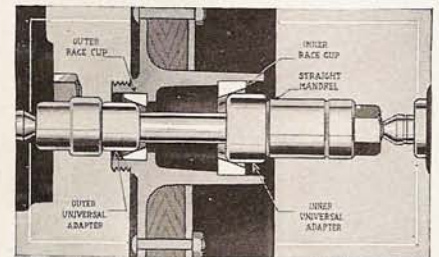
Wheel Mounted on Straight Mandrel and Universal Bearing Adapters.
